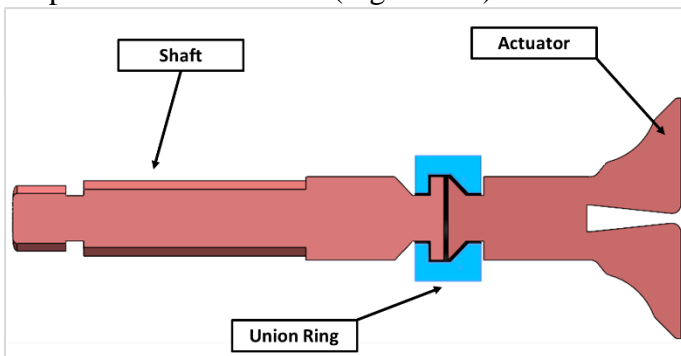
Cut View of the Shaft, Actuator and Union Ring Assembled
